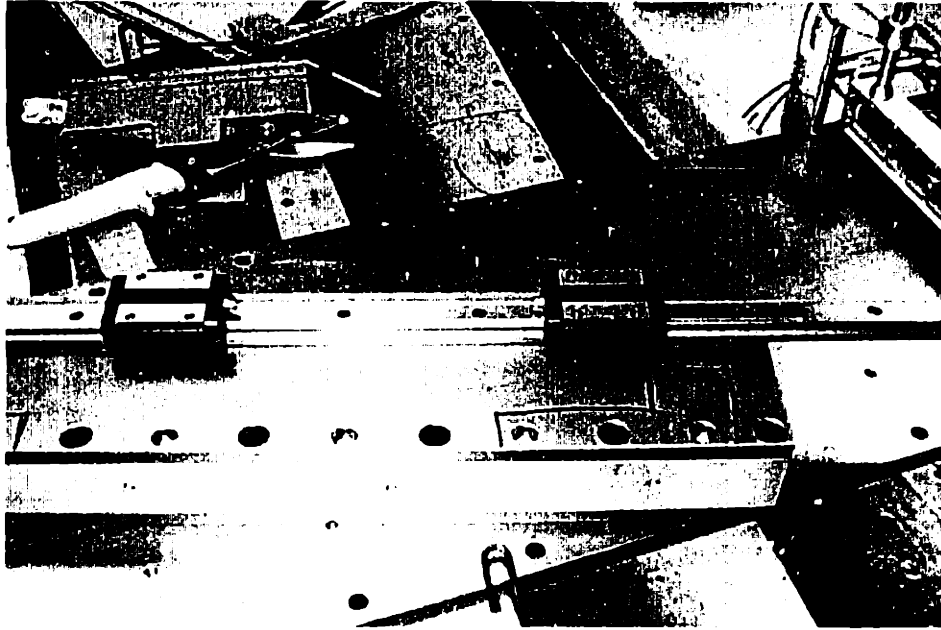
The NSK rail is mounted directly to the side of the U-shaped magnet channel.
